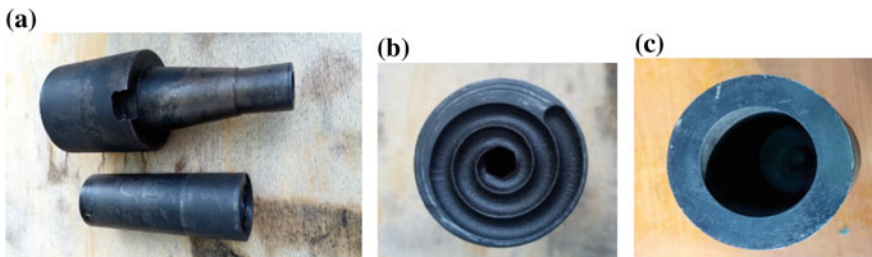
Surface of die and chamber (a), spiral face of die, (b) and cavities of chamber (c)
